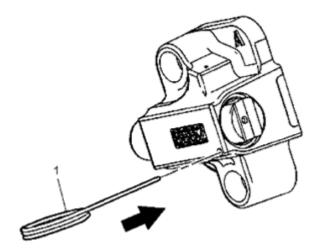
Holding Plunger Courtesy of SUZUKI OF AMERICA CORP.
